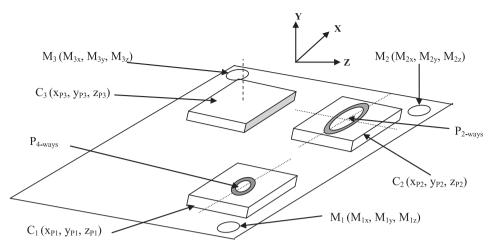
Generic 3-2-1 fixture layout design for rigid parts.
